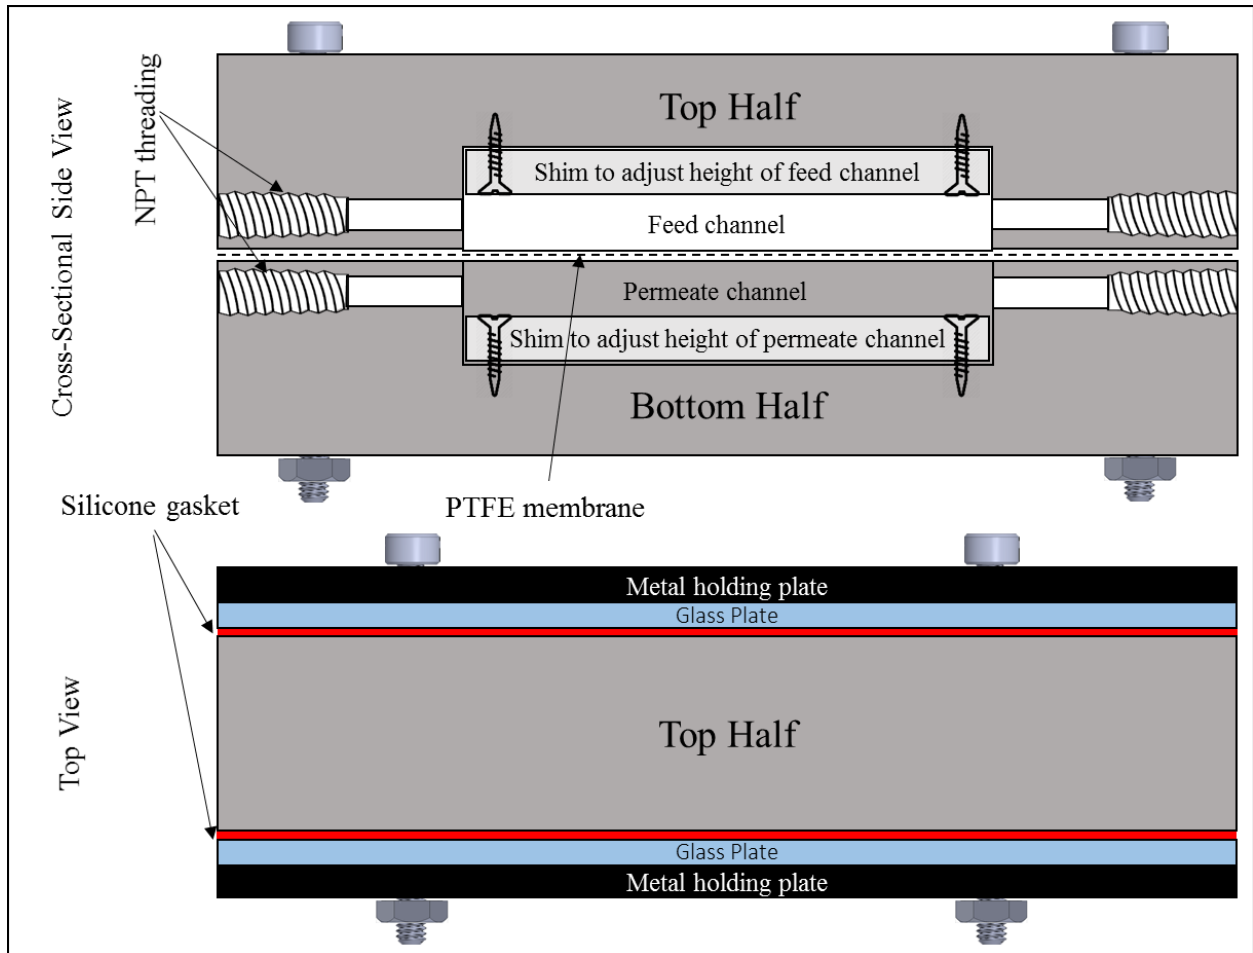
Cross-sectional side view and top view of the membrane cell.
